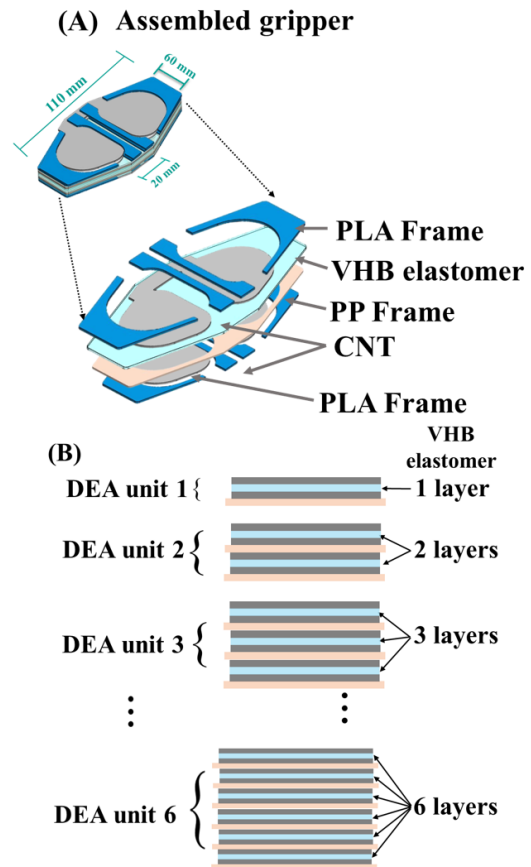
Schematics of DEA units of the soft gripper. We designed different units of DEAs for six devices. (A) Assembled soft gripper and dimension. (B) Cross-sectional view of soft gripper including DEA units in each soft gripper device.
